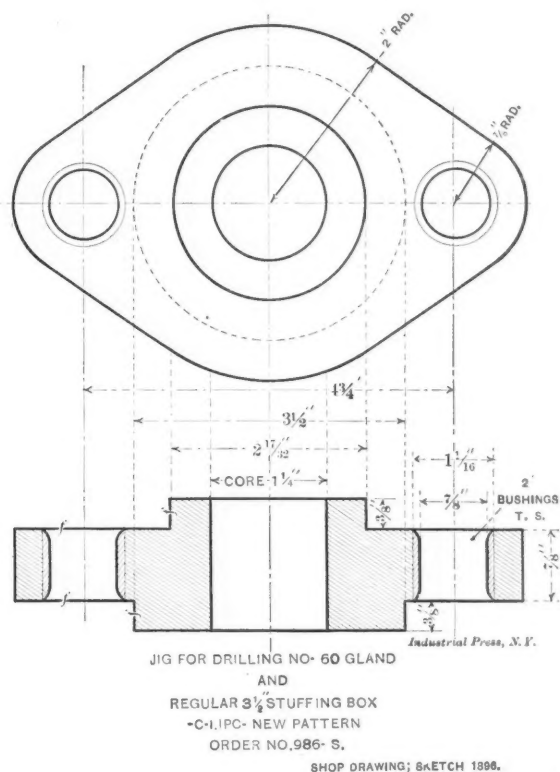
Completed Drawing of Jig for Drilling Glands and Stuffing Boxes.
